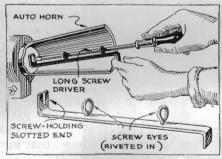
A slotted piece of flat iron or brass strip serves as a good and simple screw holder.
